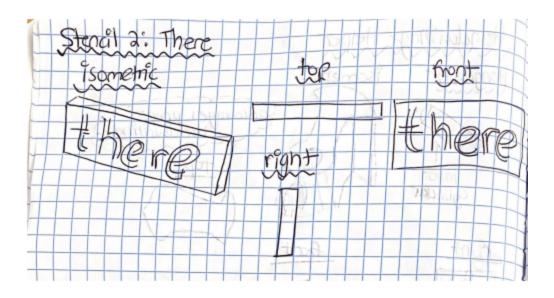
Drawings of Stencil 2 "there" design, including isometric, top, front, and right views
